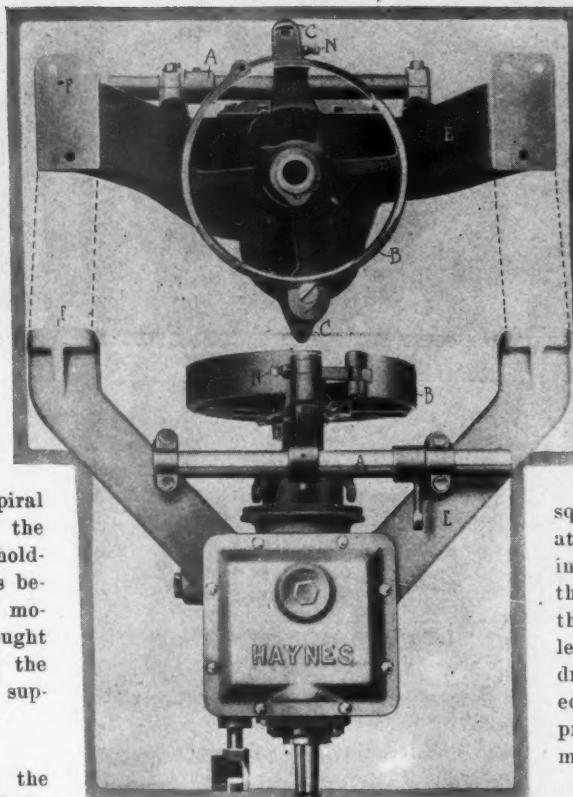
END AND TOP VIEW OF HAYNES GEARSET AND CONTRACTING BAND CLUTCH B WITH SUPPORTING ARMS E WHICH ARE BOLTED TO ENGINE BASE
